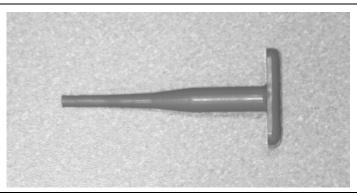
Miller #6934 Pin Removal Tool – JTEC
